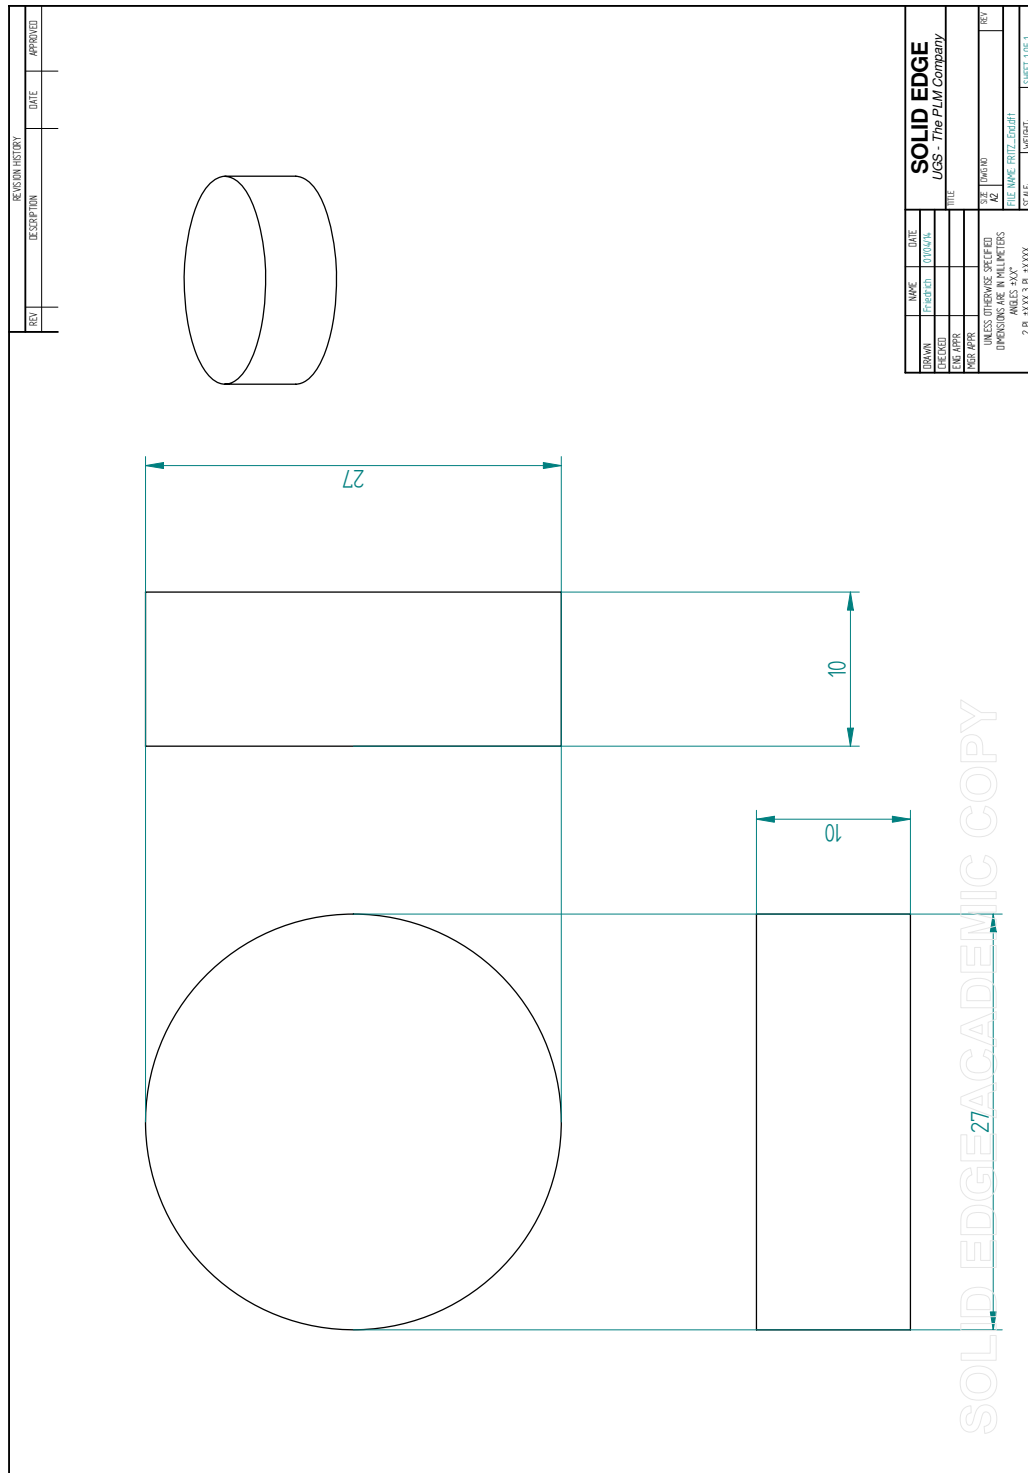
Drafts of the FRITZ sample holder (Lower part).
